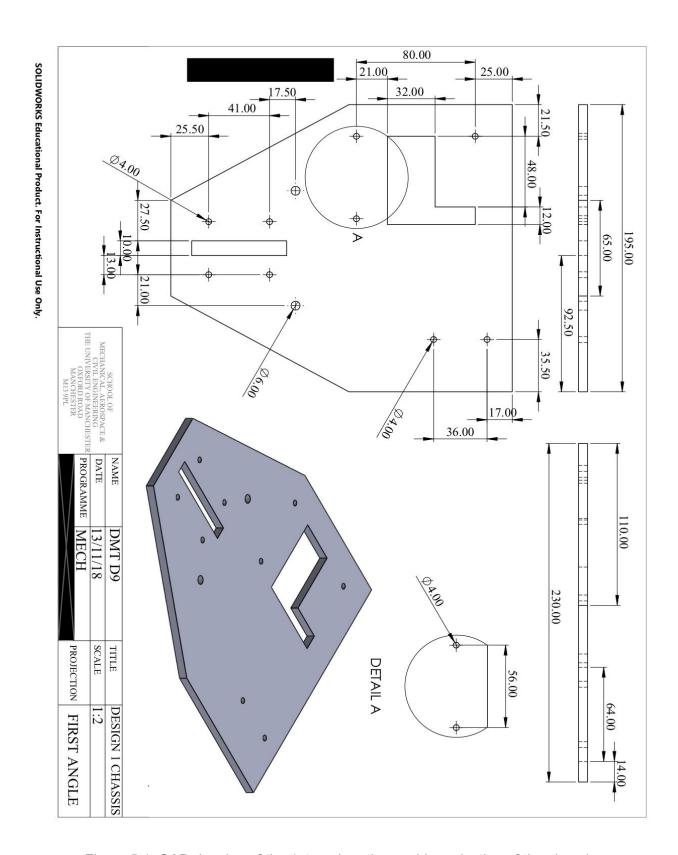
CAD drawing of the 1st angle orthographic projection of the chassis
